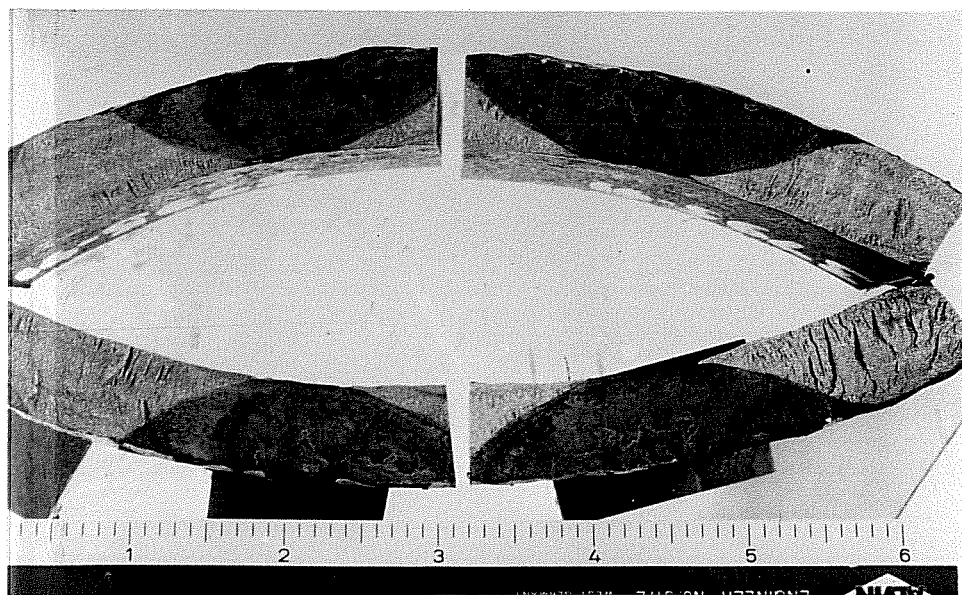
Fracture Surface of Fatigue Crack
